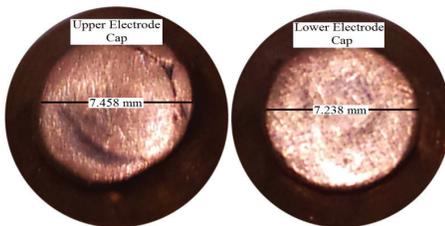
The electrode microstructural view (welding and cutting)
